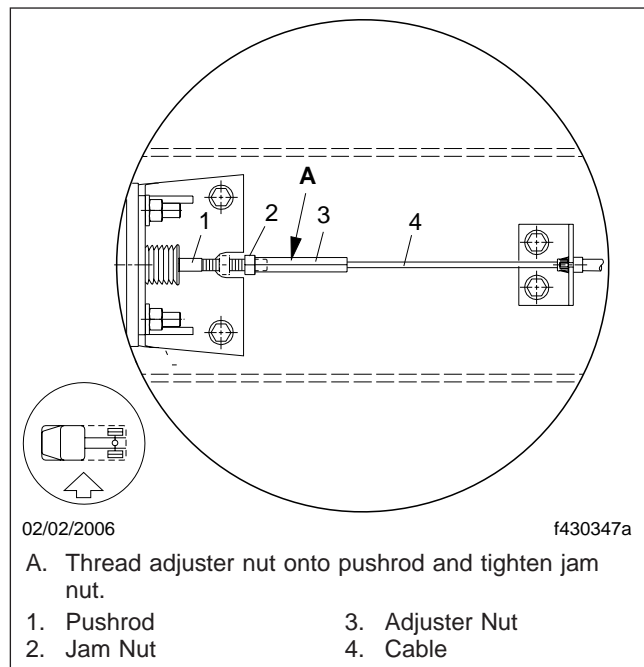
, Air-Actuated Parking Brake Cable Adjustment
